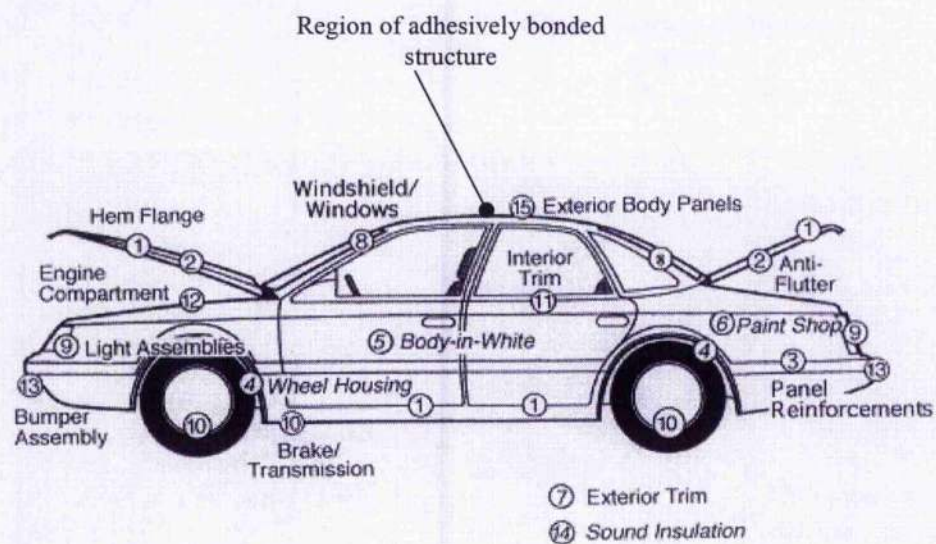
Diagram of an automobile showing locations in which adhesive and sealants could be used or are being used [3]
